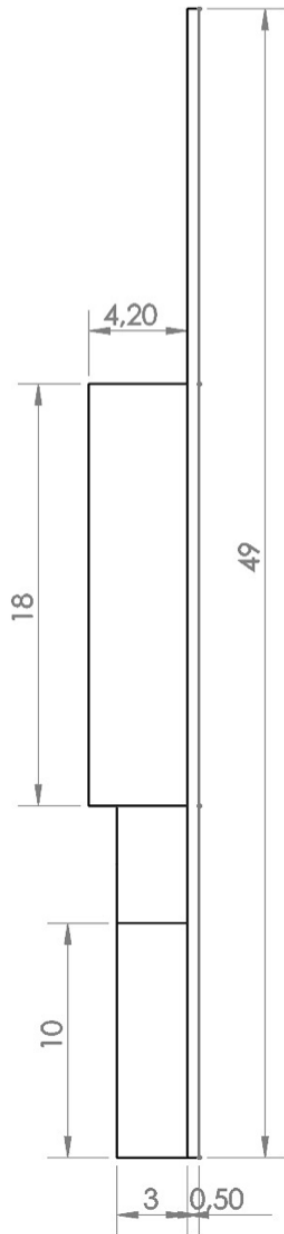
Side view of upper mould with 0.5 mm thickness (dimensions in millimetres).
